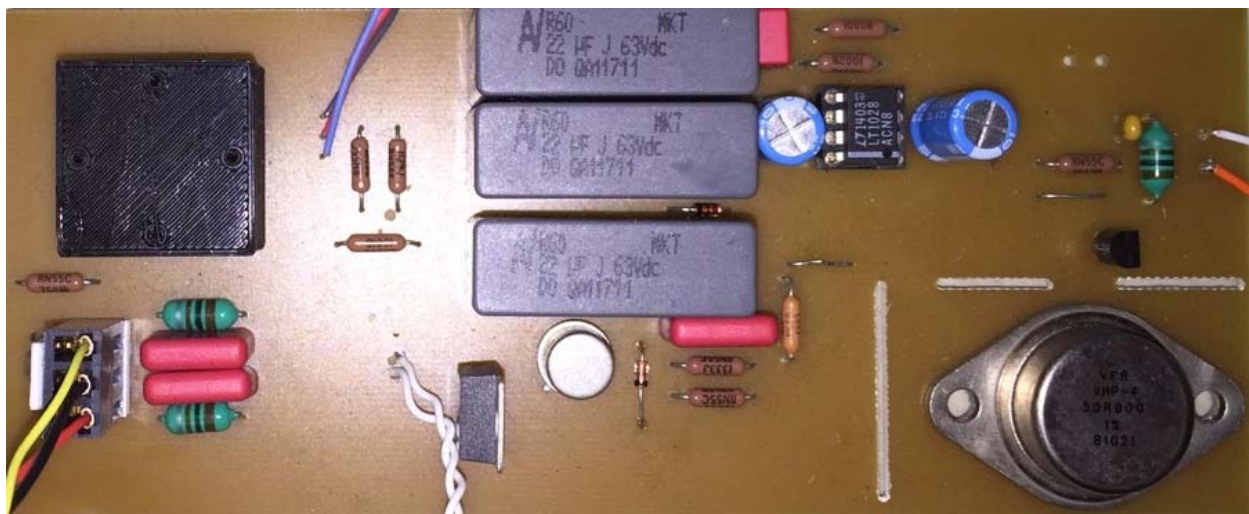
Photograph of front view of PCB prototype (VHP-4 bottom right hand side)
